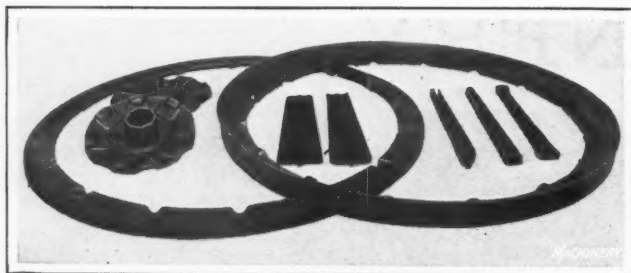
Flanges, Spokes, and Rims for Pressed-steel Wheel
